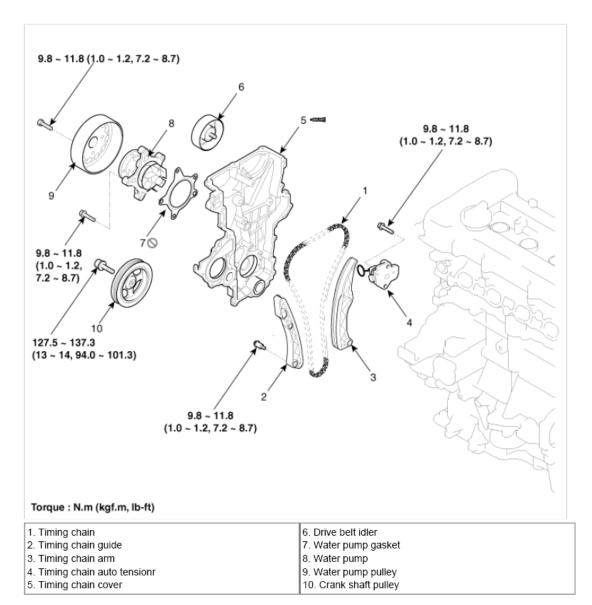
Identifying Timing Chain Components With Torque Specifications Courtesy of HYUNDAI MOTOR AMERICA
